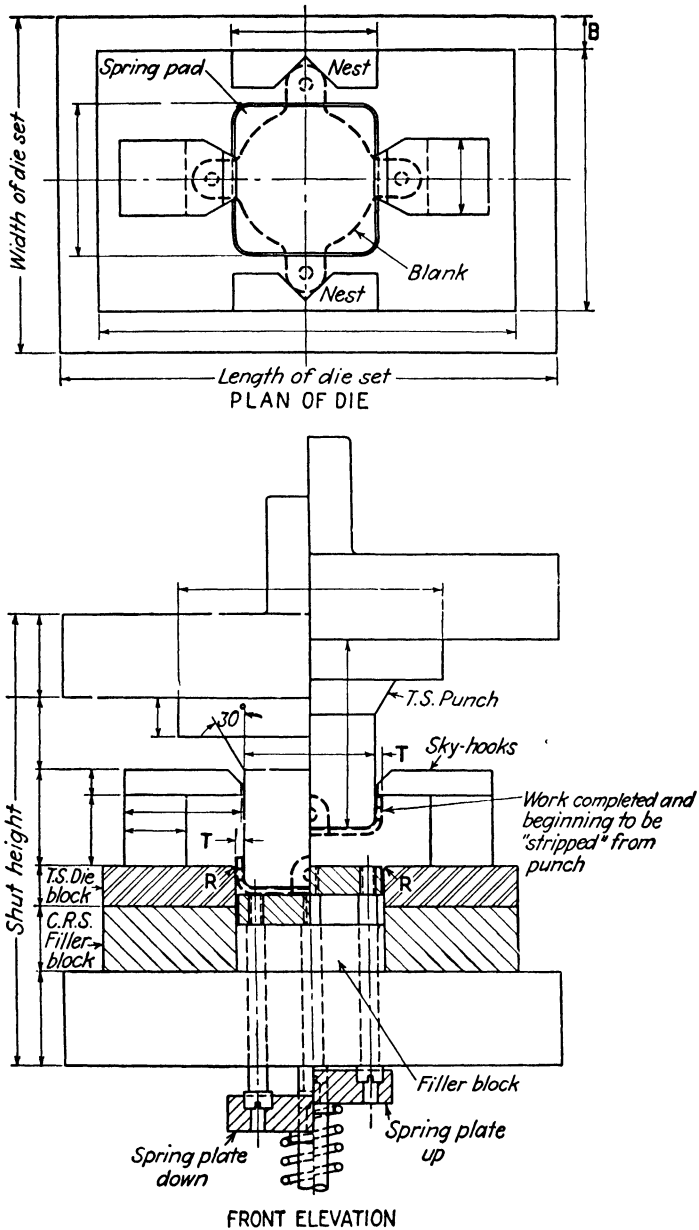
An enclosed type of spring-pad bending punch and die.
